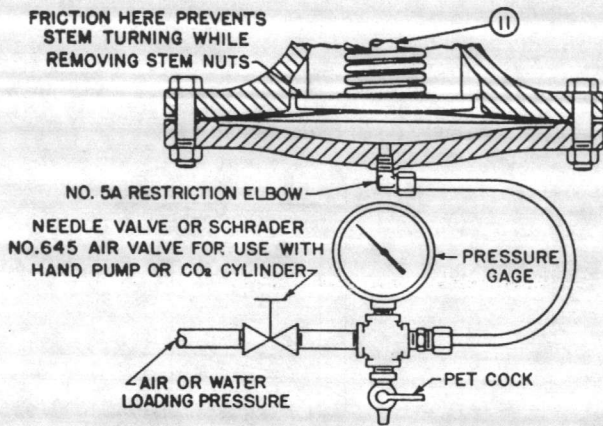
Air Loading Arrangement for Removing Stem Nuts
